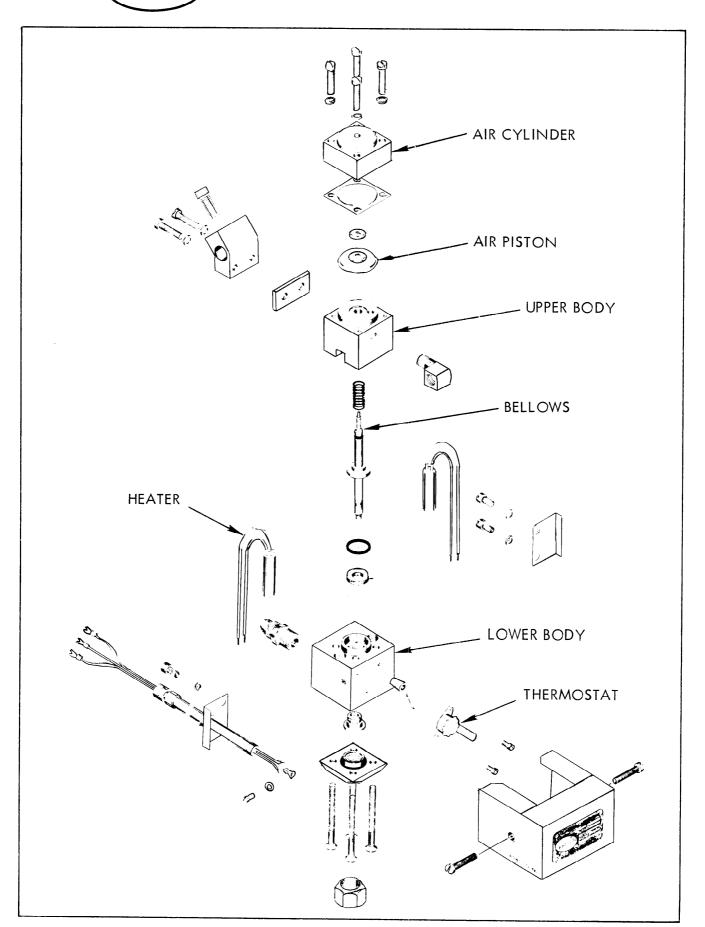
AD-28 Automatic Gun Drawing SUPERSEDES
